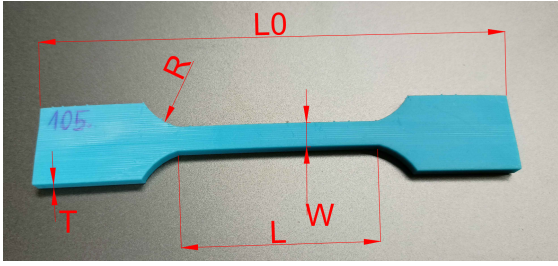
Basic dimensions of tensile sample used from ASTM D638-14 standard.
